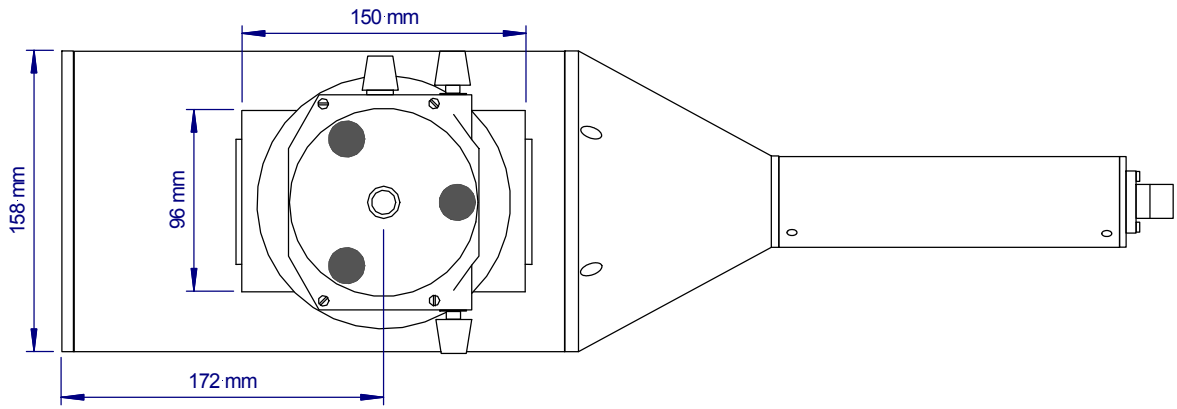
BLS450 / BLS900 Receiver – Bottom View
